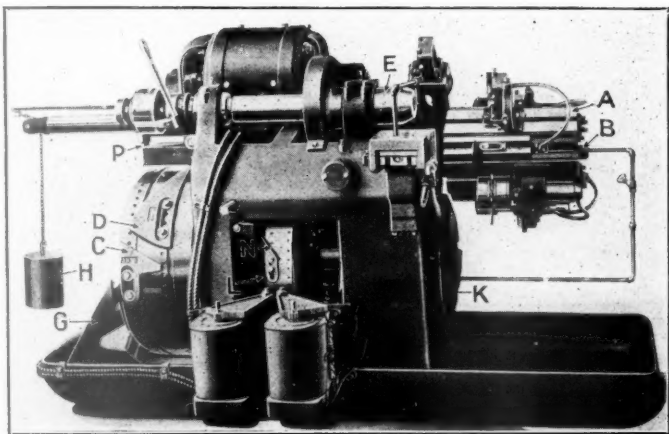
Typical Single Spindle Automatic Turret Lathe
